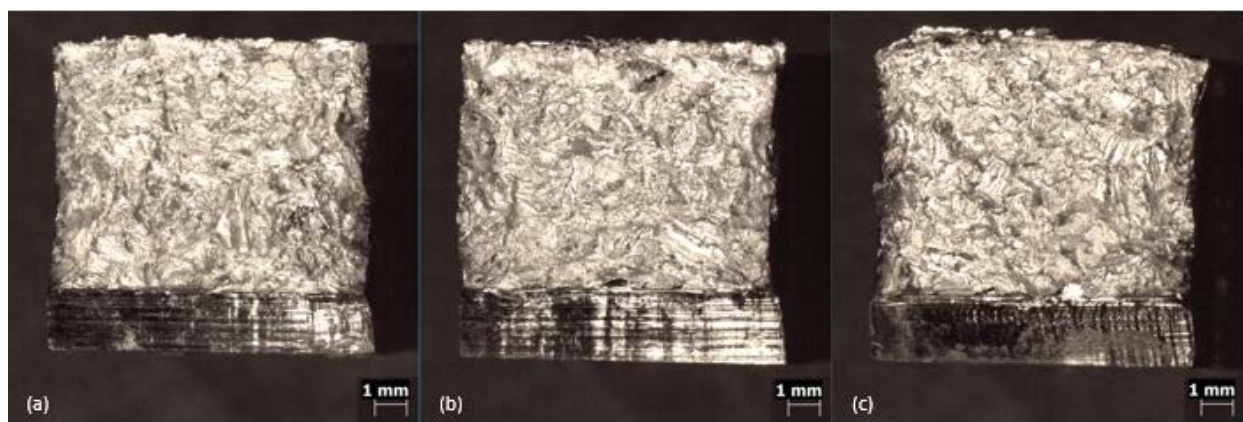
Fracture surfaces of β -annealing samples at (a)-25°C, (b) 200°C and (c) 400°C.
